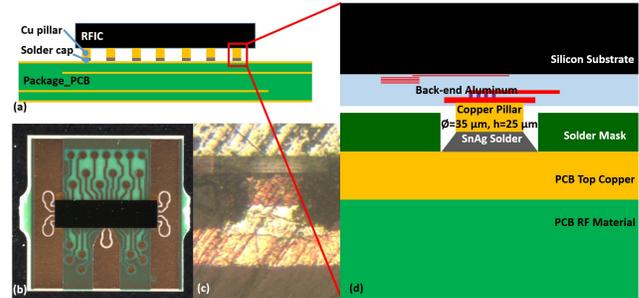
The C2 flip-chip configuration. (a) is the schematic drawing of the package, (b) is the assembled package, (c) is the cross-section of the Cu pillar, and (d) is the schematic drawing of the assembled Cu pillar.
